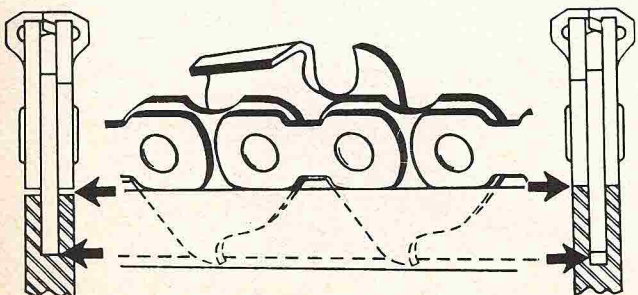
Guide groove too shallow in cross section view at left. Tang must clear bottom of groove as in cross section view at right.
